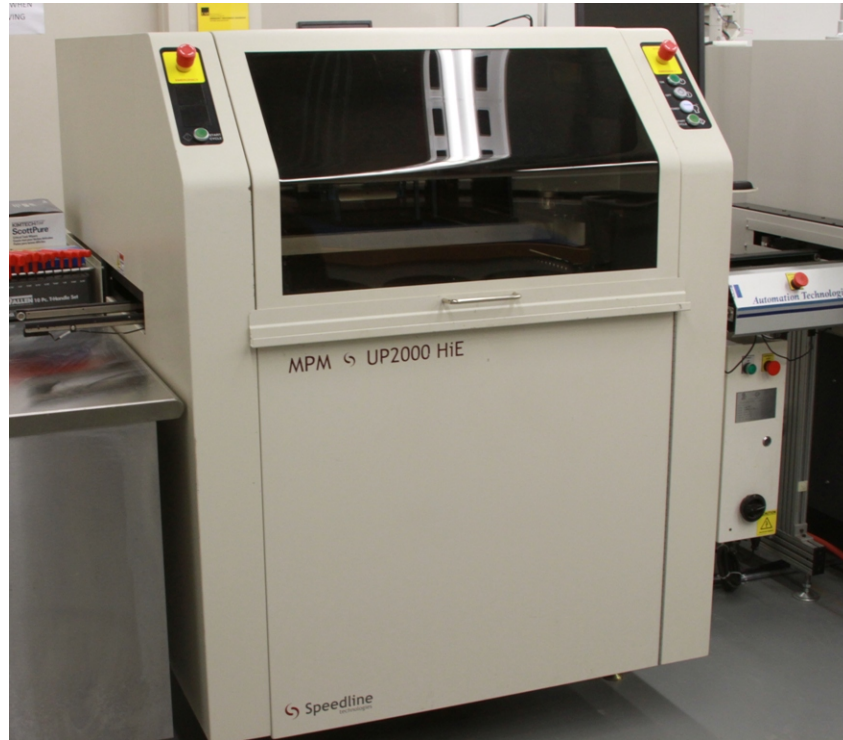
Solder paste print machine MPM UP2000 HiE
